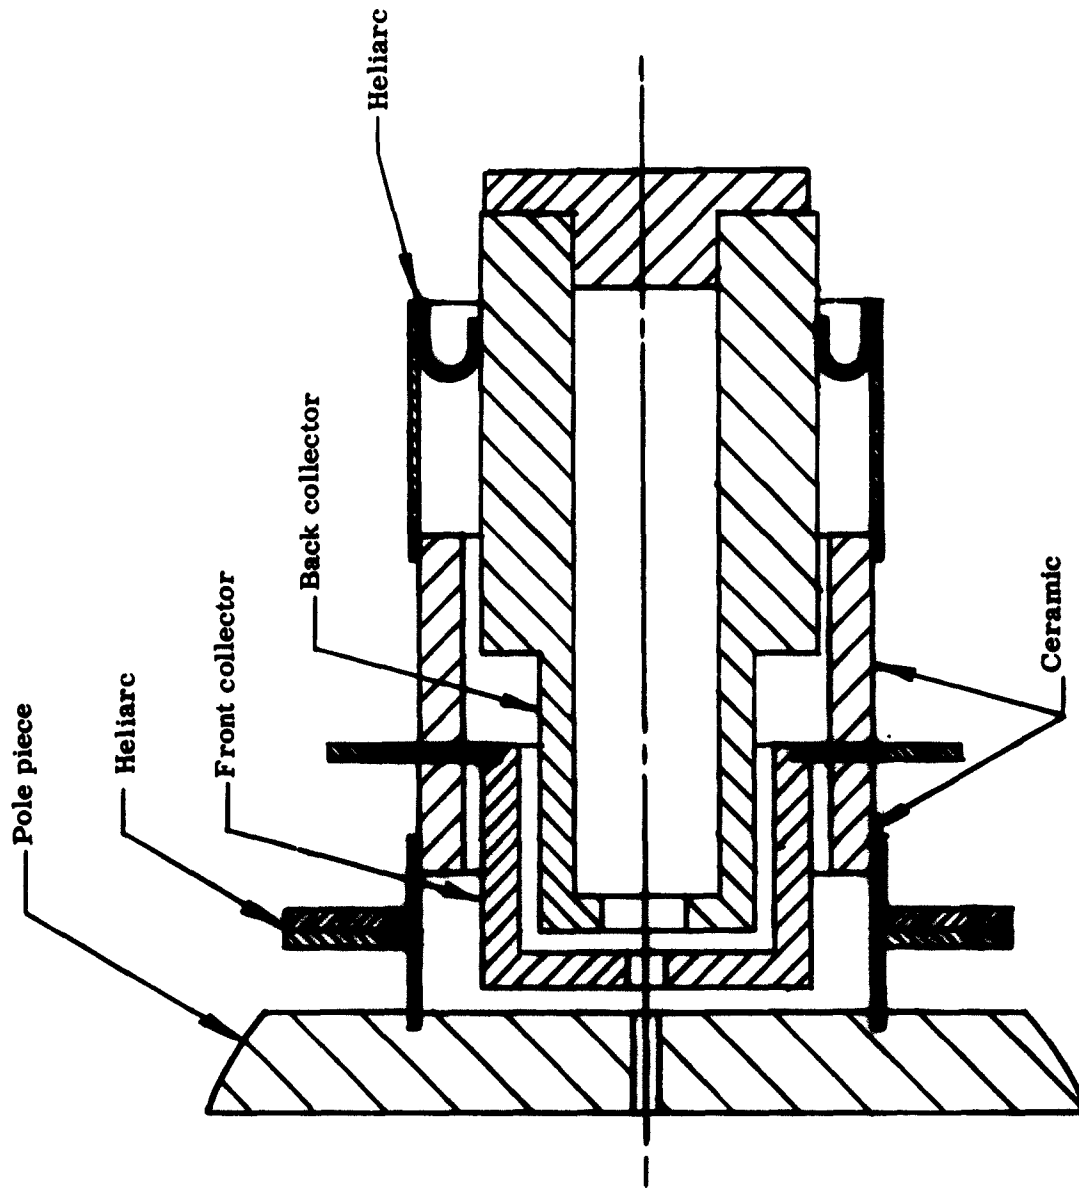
Assembly drawing of the first, two-stage, depressed collector design. All parts for this design have been made and are awaiting assembly.
